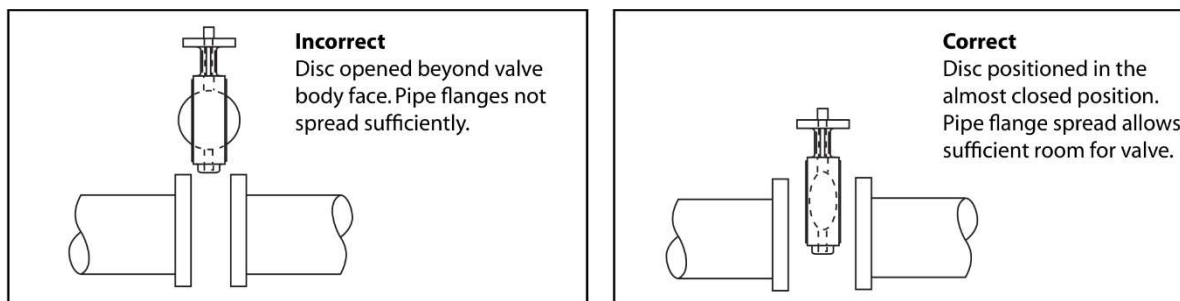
CENTERING AND FLANGING OF VALVE
